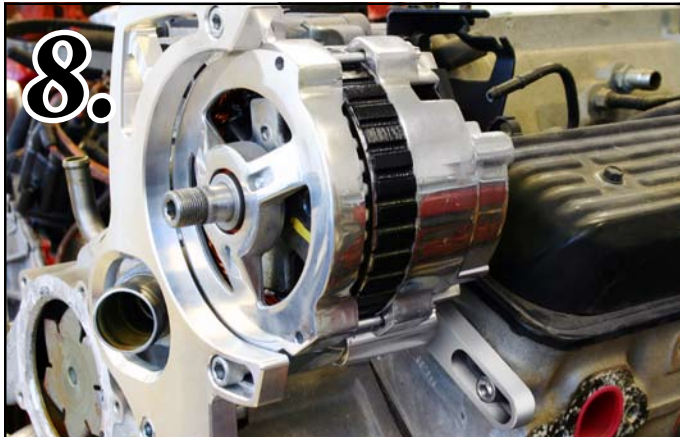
Install the Alternator (P572) using (1) M8 x 25mm SHCS (S551) in the top mounting hole, and a $\frac{3}{8}$ x 3 $\frac{1}{2}$ " SHCS (S270) in the lower slotted hole lining up with the rear Alternator Rear Support. Use the (S450) Threaded Adjustment Screw to take up any slack before tightening bolt.
